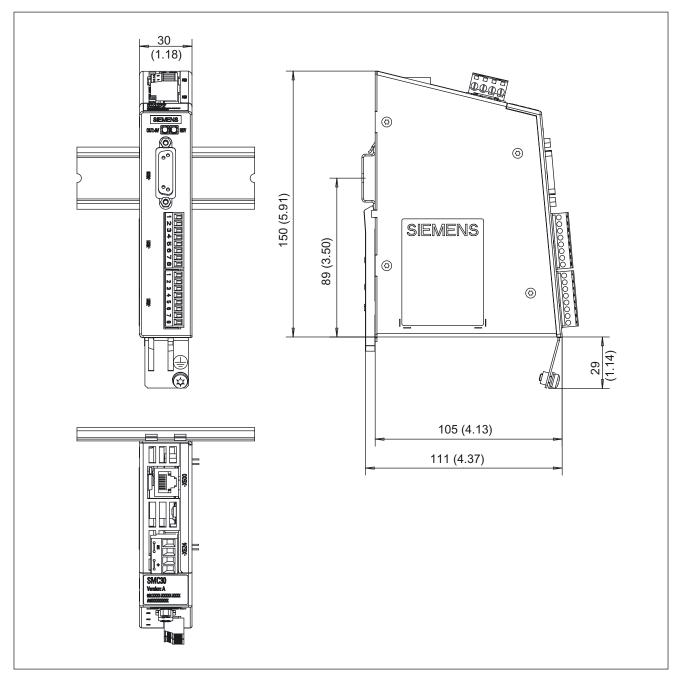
Dimension drawing SMC30: 30 mm wide
